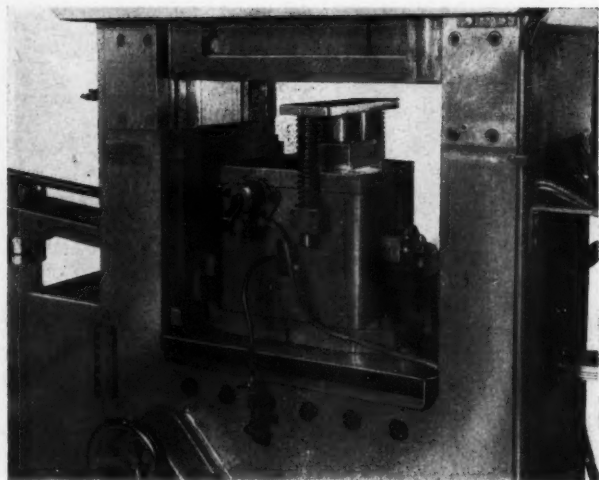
Close-up view of the tool on the Colforg cropping machine
